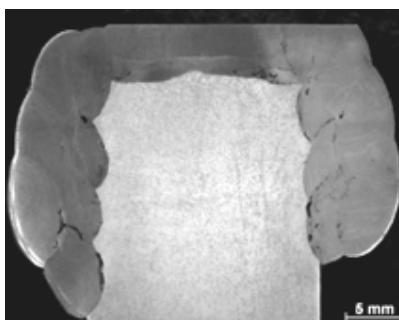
Two-layer overlay weld with slag inclusions (3012) and gas pores between runs and layers [2]
